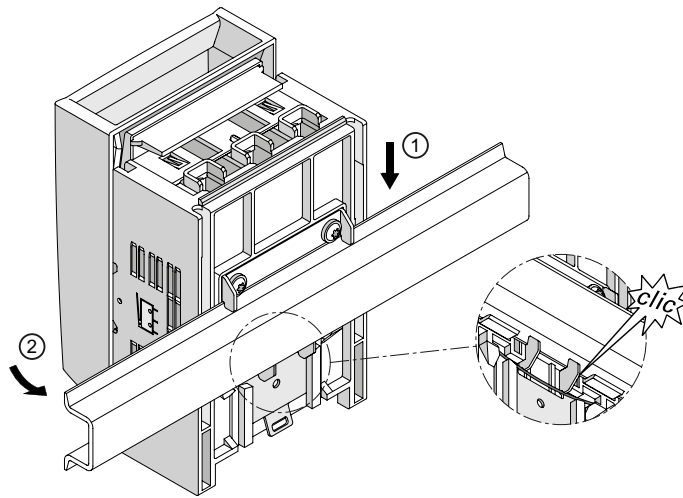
Mounting the fuse switch disconnecter, size 000 onto a standard rail (2)
